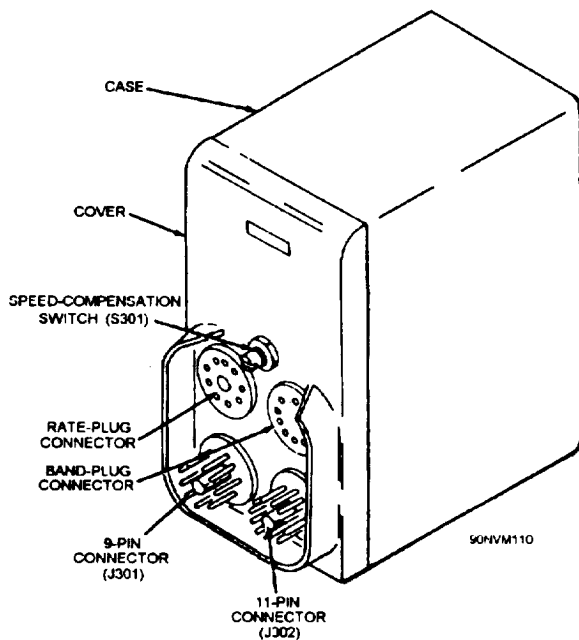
Mk 21 Mod 0 firing mechanism.
